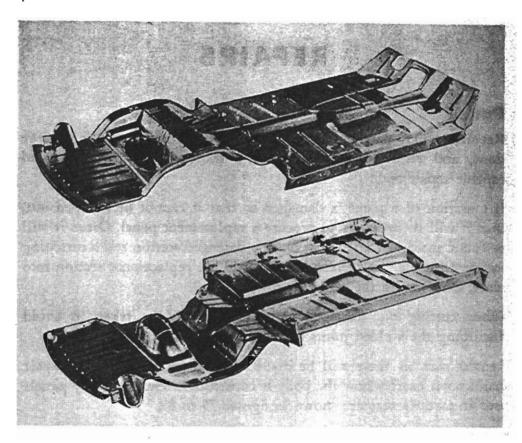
The One Piece Floor Has Heavy Ribs To Stiffen Flat Sections, and Extra Cross Braces for Rigidity.
